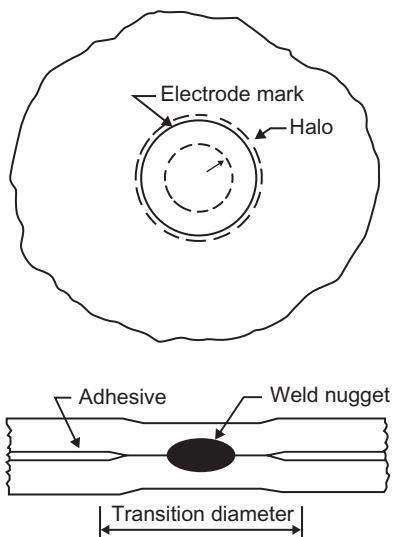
Schematic description of a spot-weld in a single-lap weldbond joint [26].
